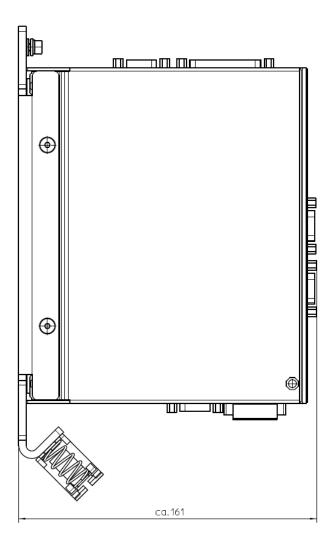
CMMS-ST stepping motor controller: Assembly
